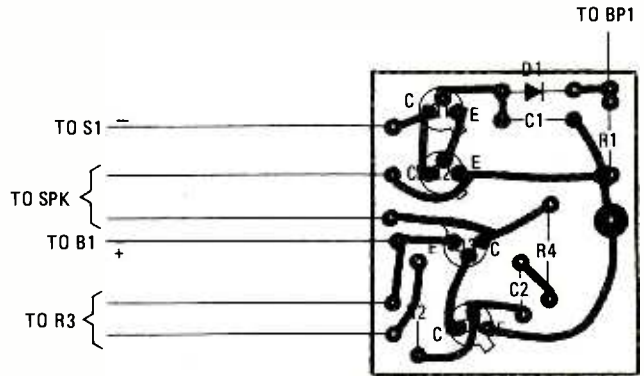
COMPONENT POSITION IDENTIFICATION is given here as it would appear should you look at the finished project board with the foil side down.
